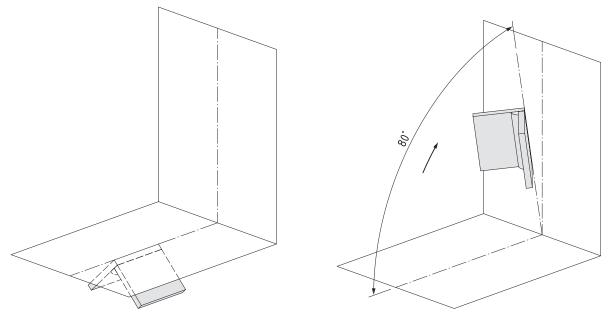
Welding position PA slope and rotation limits for fillet welds
